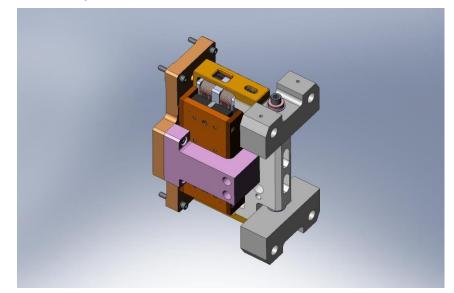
Vertical Actuator, ready for installation in HAM ISI.
